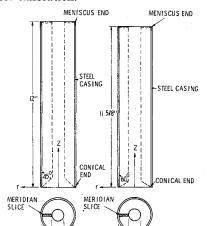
Geometry and dimensions of hollow circular cylinders.
